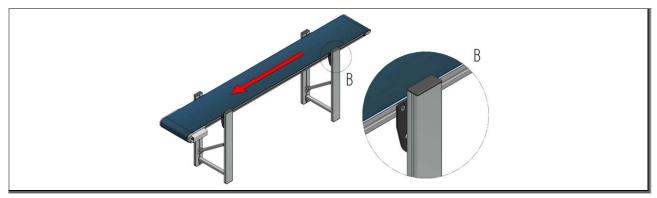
Overall construction assembly, conveyor with support AM 1030 (typical)
